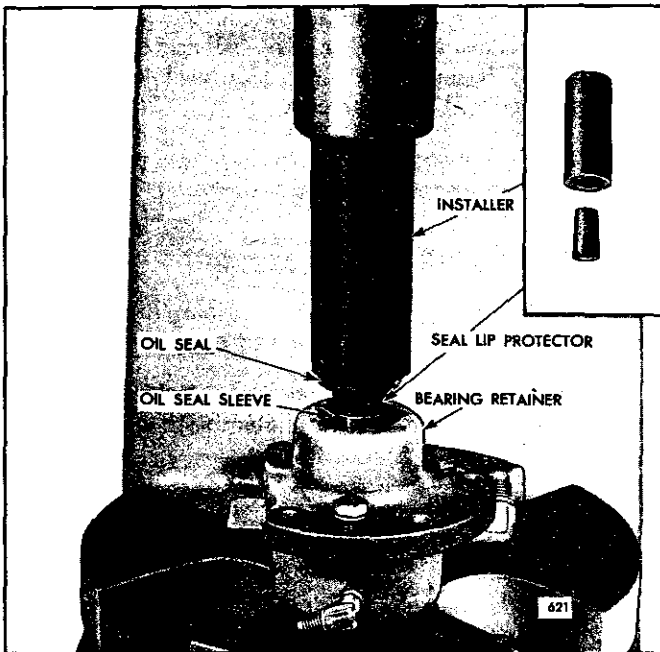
Installing Pump Shaft Oil Seal in Bearing Retainer
